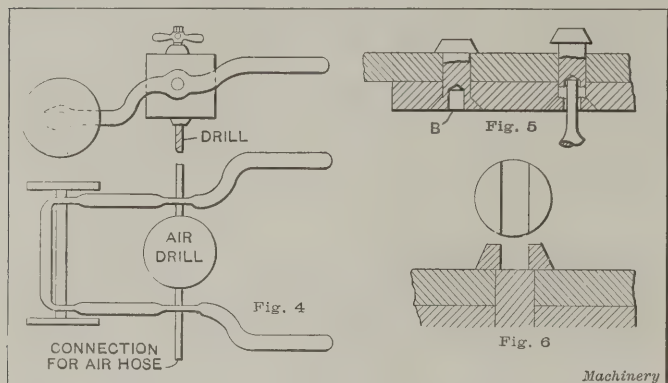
A Substitute for the "Helper." Fig. 5. Method of Removing Rivets. Fig. 6. Method of Cutting-off Rivet Heads
